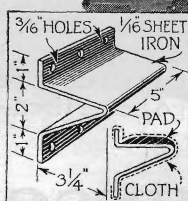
A piece of sheet iron bent and slotted makes handy choker rod holder
